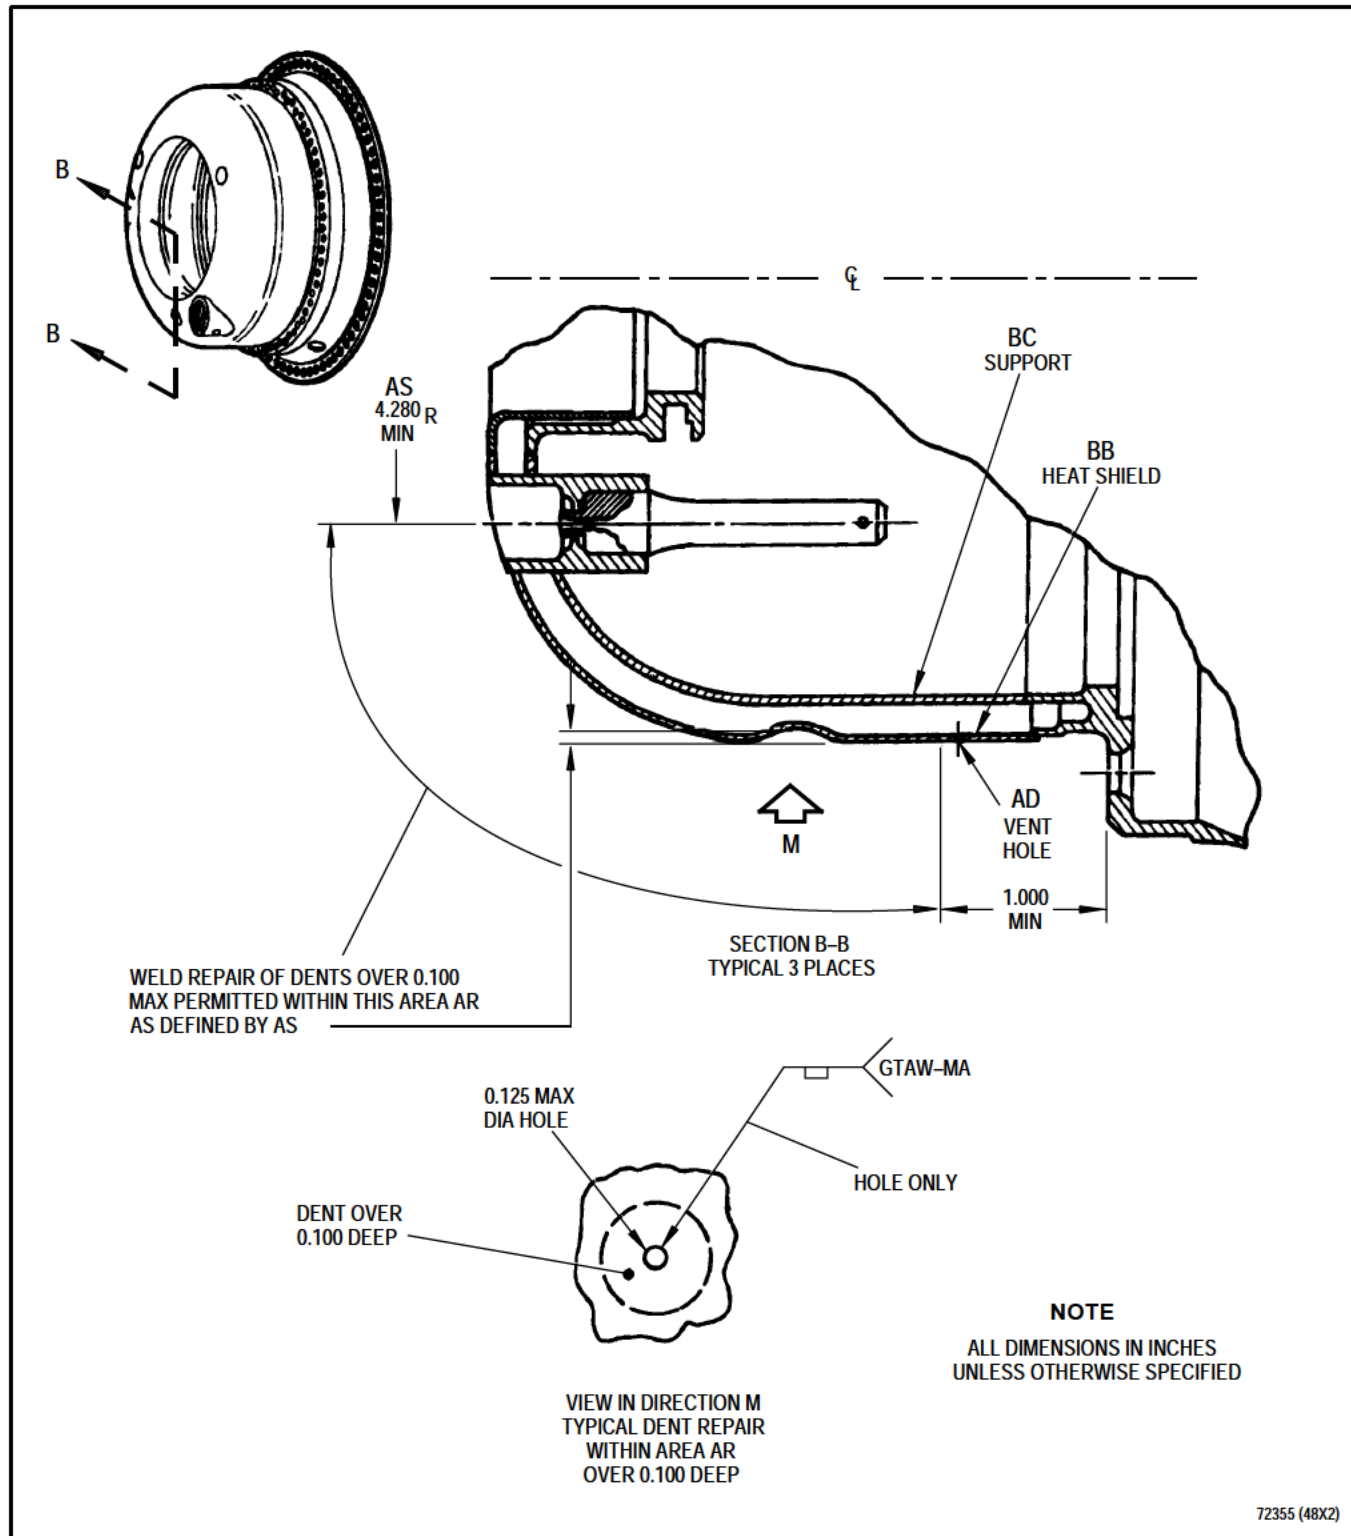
No. 4 Bearing Front Seal Support Assembly - Heat Shield Dent Weld Repair
